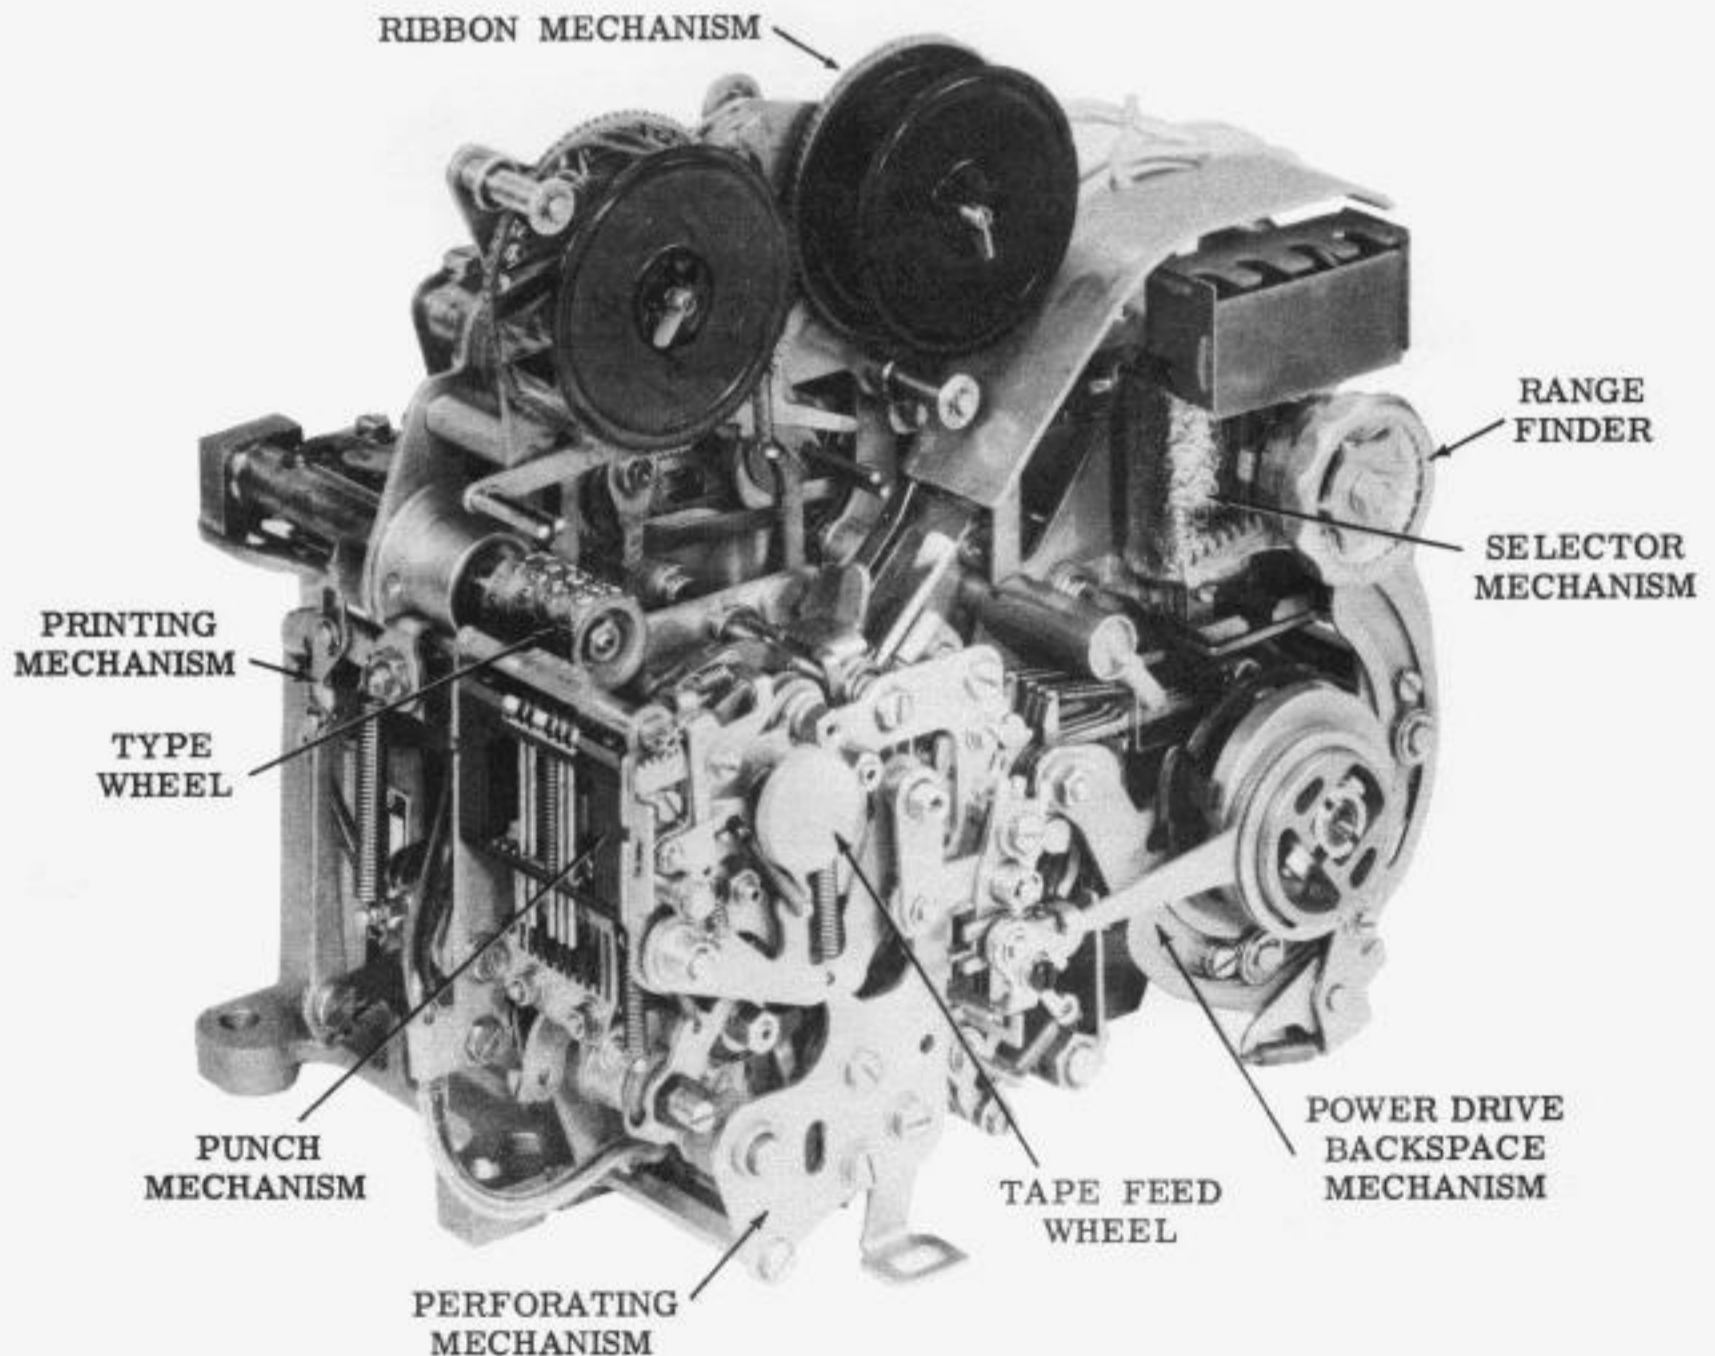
28 Typing Reperforator Unit - Chadless Tape (Left Front View)
